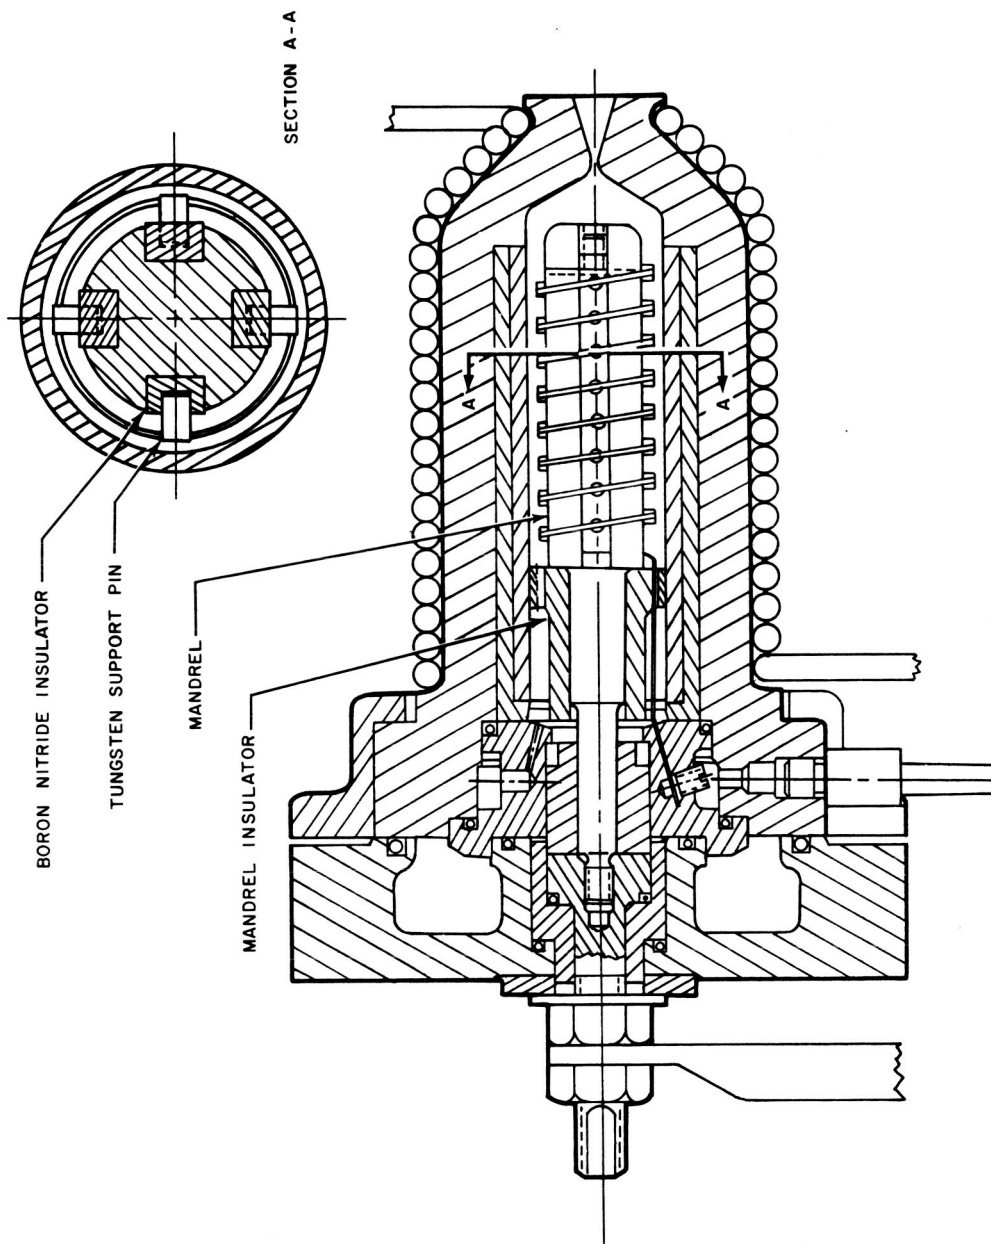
MARK III, MOD 2 THRUSTOR DESIGN
